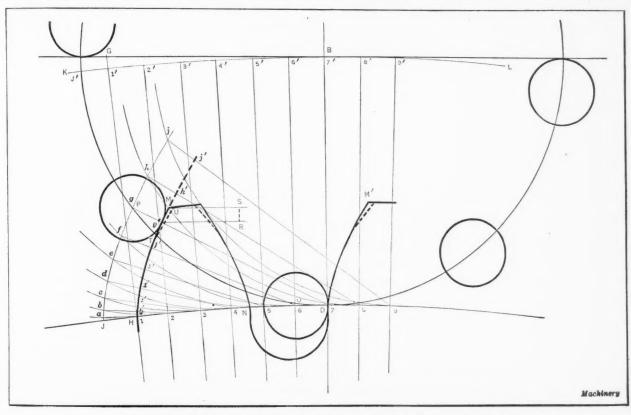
Enlarged Diagram showing Method of laying out Gear Tooth Curves for Pin Gearing
